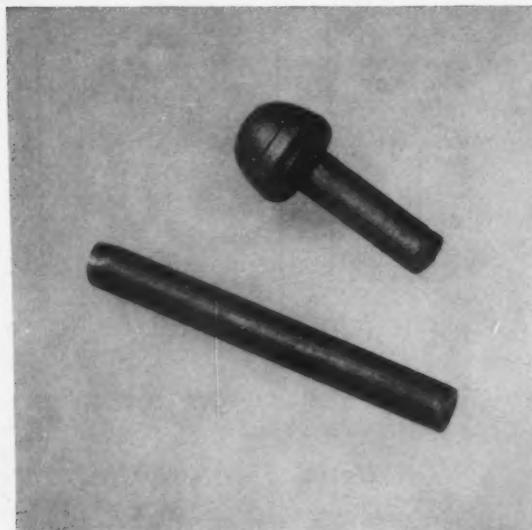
Improper heading practice can cause cold shunts. Here, a poor shear resulted in double upset and circular cold shunt.
